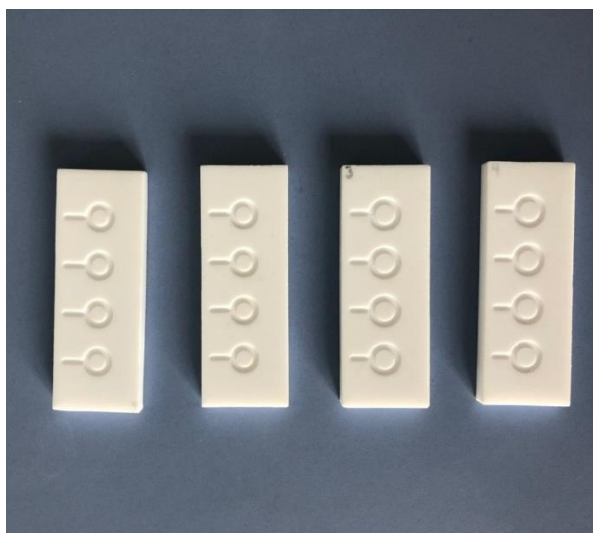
4 types of Teflon molds with various diameters and depth sizes (obtained after processing on milling machine).
